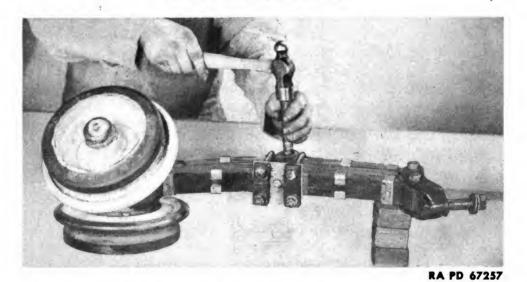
Replacing Bogie Wheel Spring Bracket Bushings
